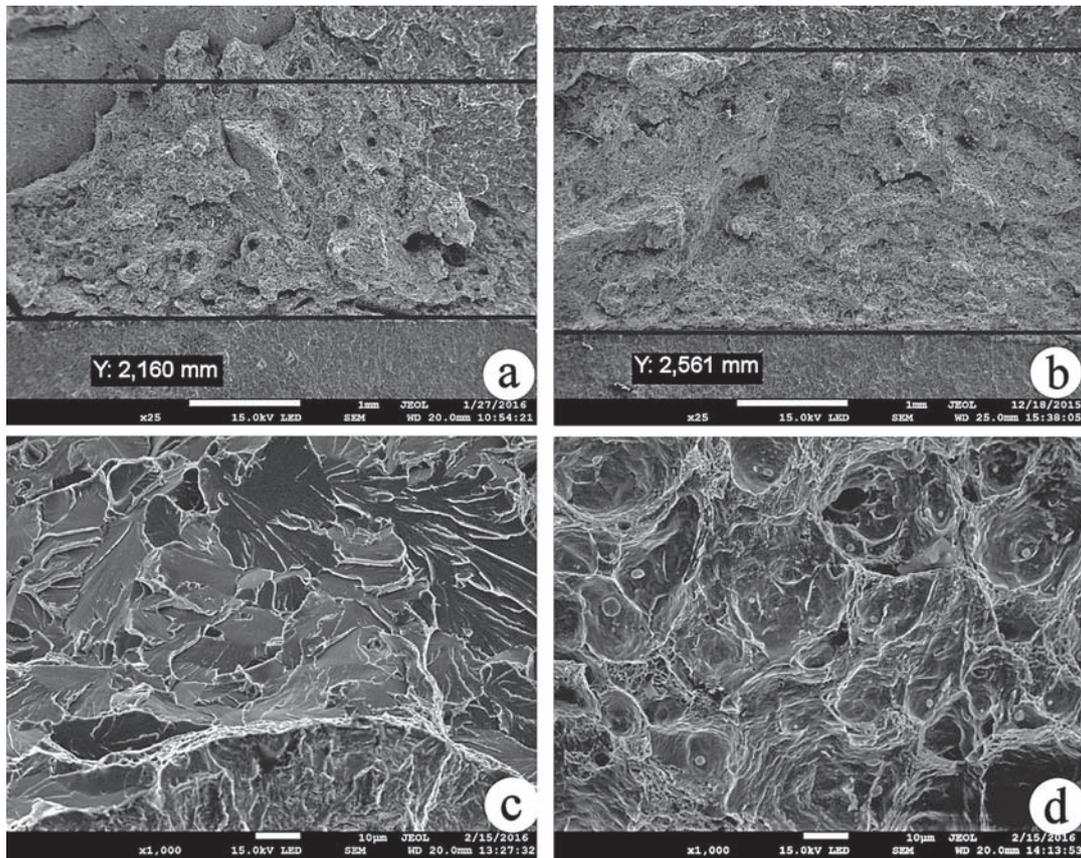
Fracture surface under the notch bottom: a,c – non modified, b,d – modified
